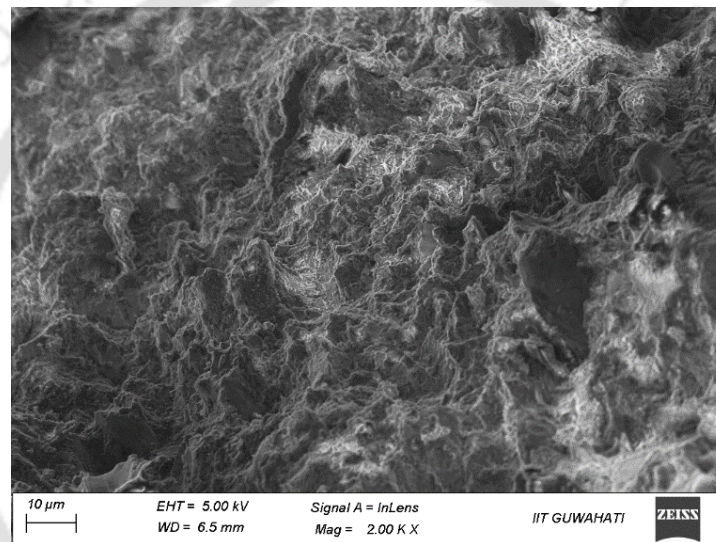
SEM micrograph showing Fe-SMA sample taken from the fracture zone of tensile test coupon specimen after failure
